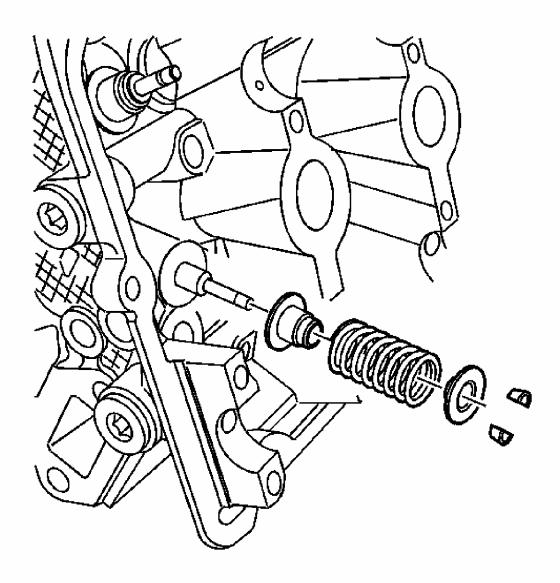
Identifying Valve Spring Components Courtesy of GENERAL MOTORS CORP.
